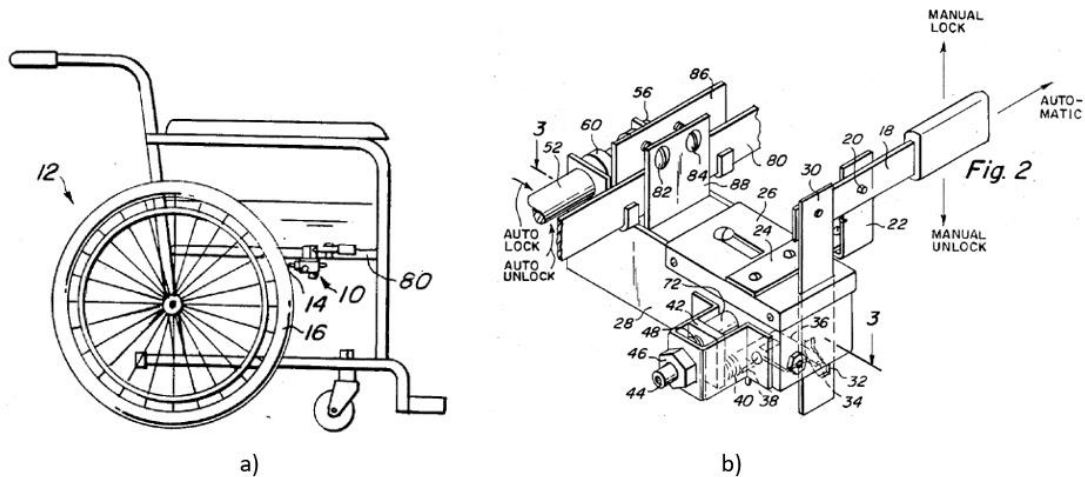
a) Side view of the wheelchair. b) Three-mechanism.
